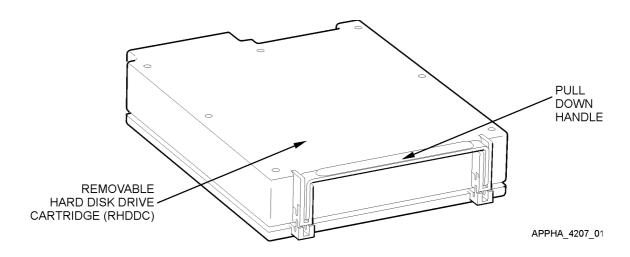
Removable Hard Disk Drive Cartridge (NSN 7025-01-474-3789/NSN 7025-01-487-0580)
